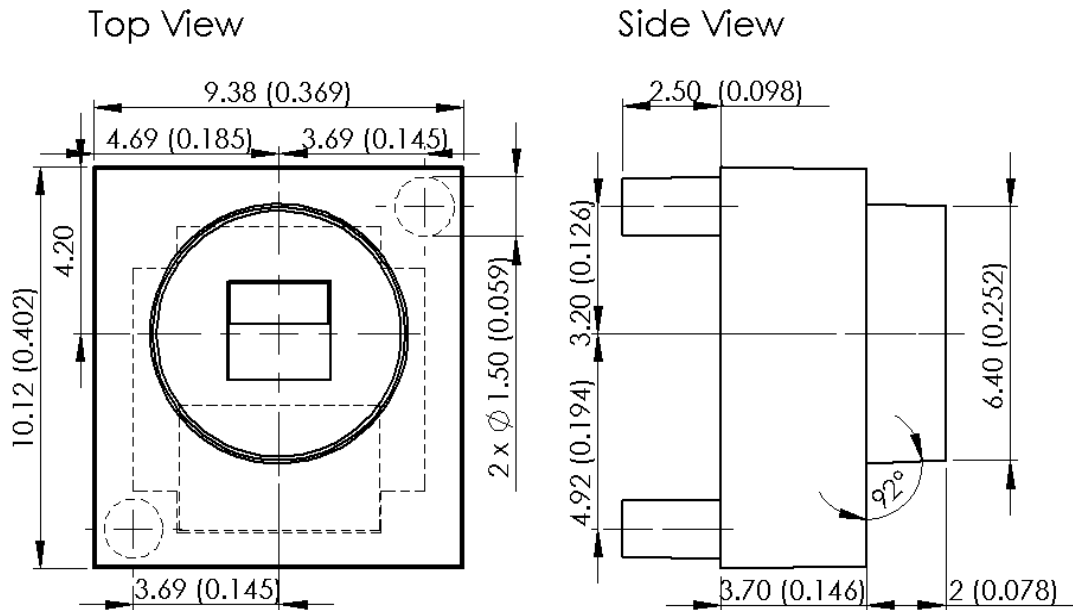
Dimensions of the Filter Cap in mm (inch), tolerances: +/- 0.03 mm
